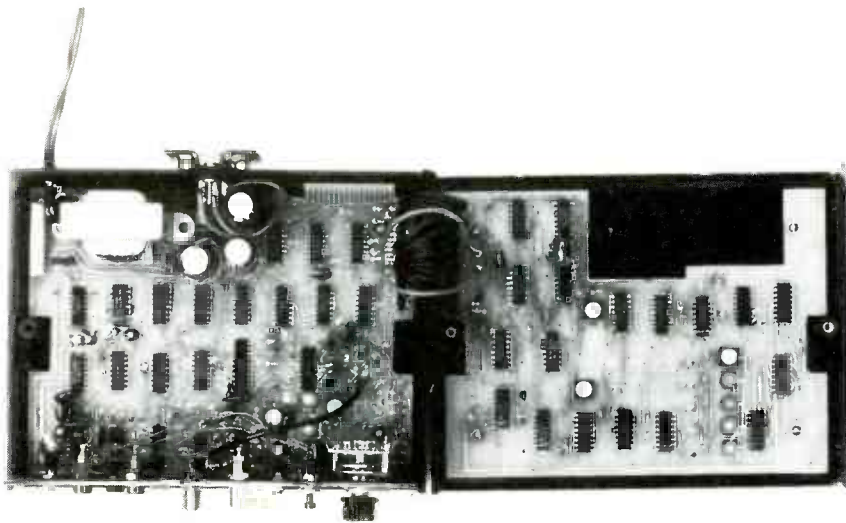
SUGGESTED MOUNTING METHOD of the two boards is shown here in a photograph of the author's prototype.
